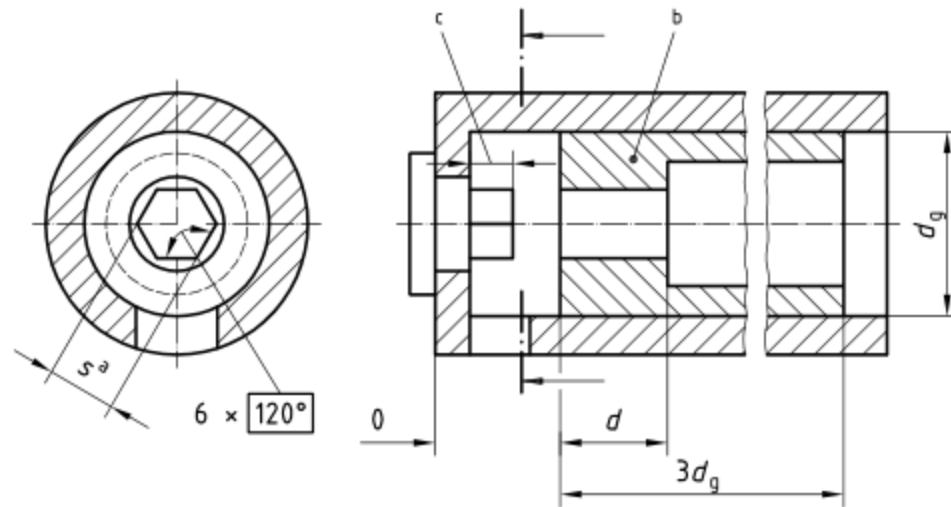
Gauge for verifying form tolerance specified in Figures 24 and 72
